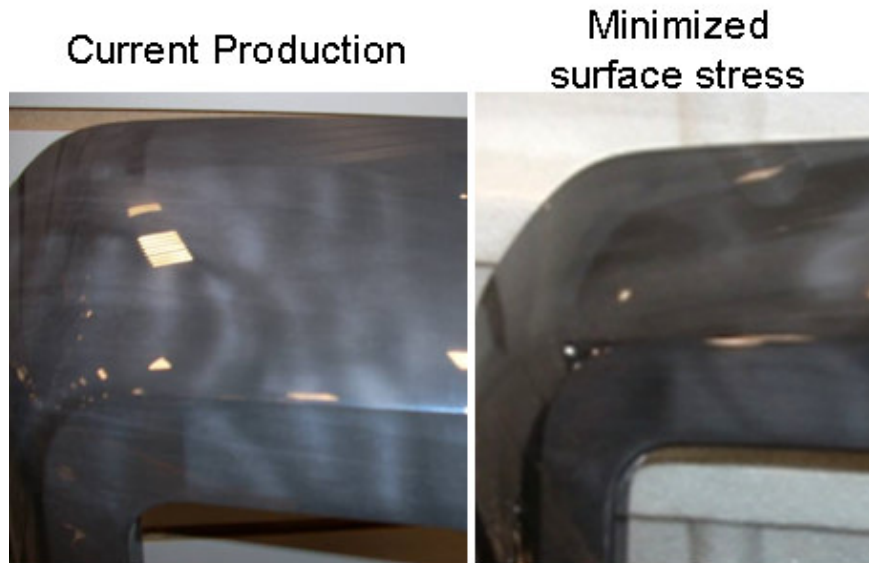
Pictures of grille molded using current production molding parameters after glacial acetic acid testing
